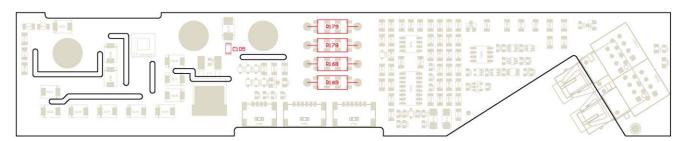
Assembly drawing of 1SP0340V2M0 with highlighted gate resistors and gate capacitor
